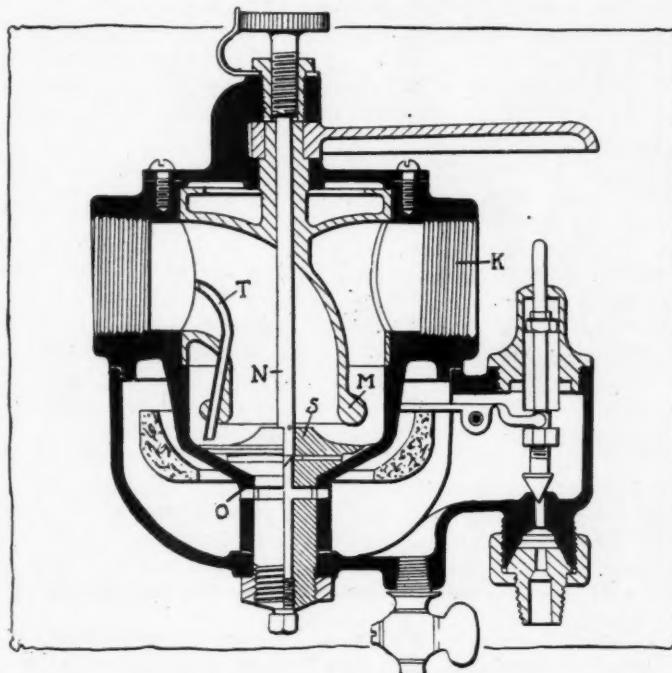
Krice carburetor has no needle valve, but annular gasoline passage
